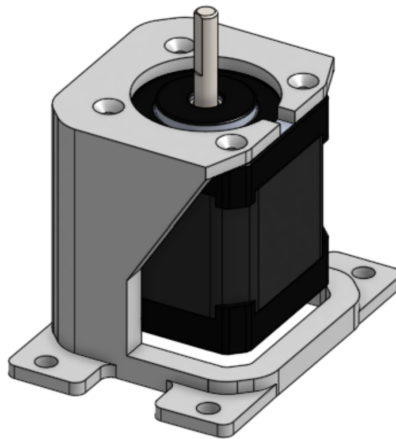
Auger motor seated into the Auger Motor Mount, viewed from the shaft side.
